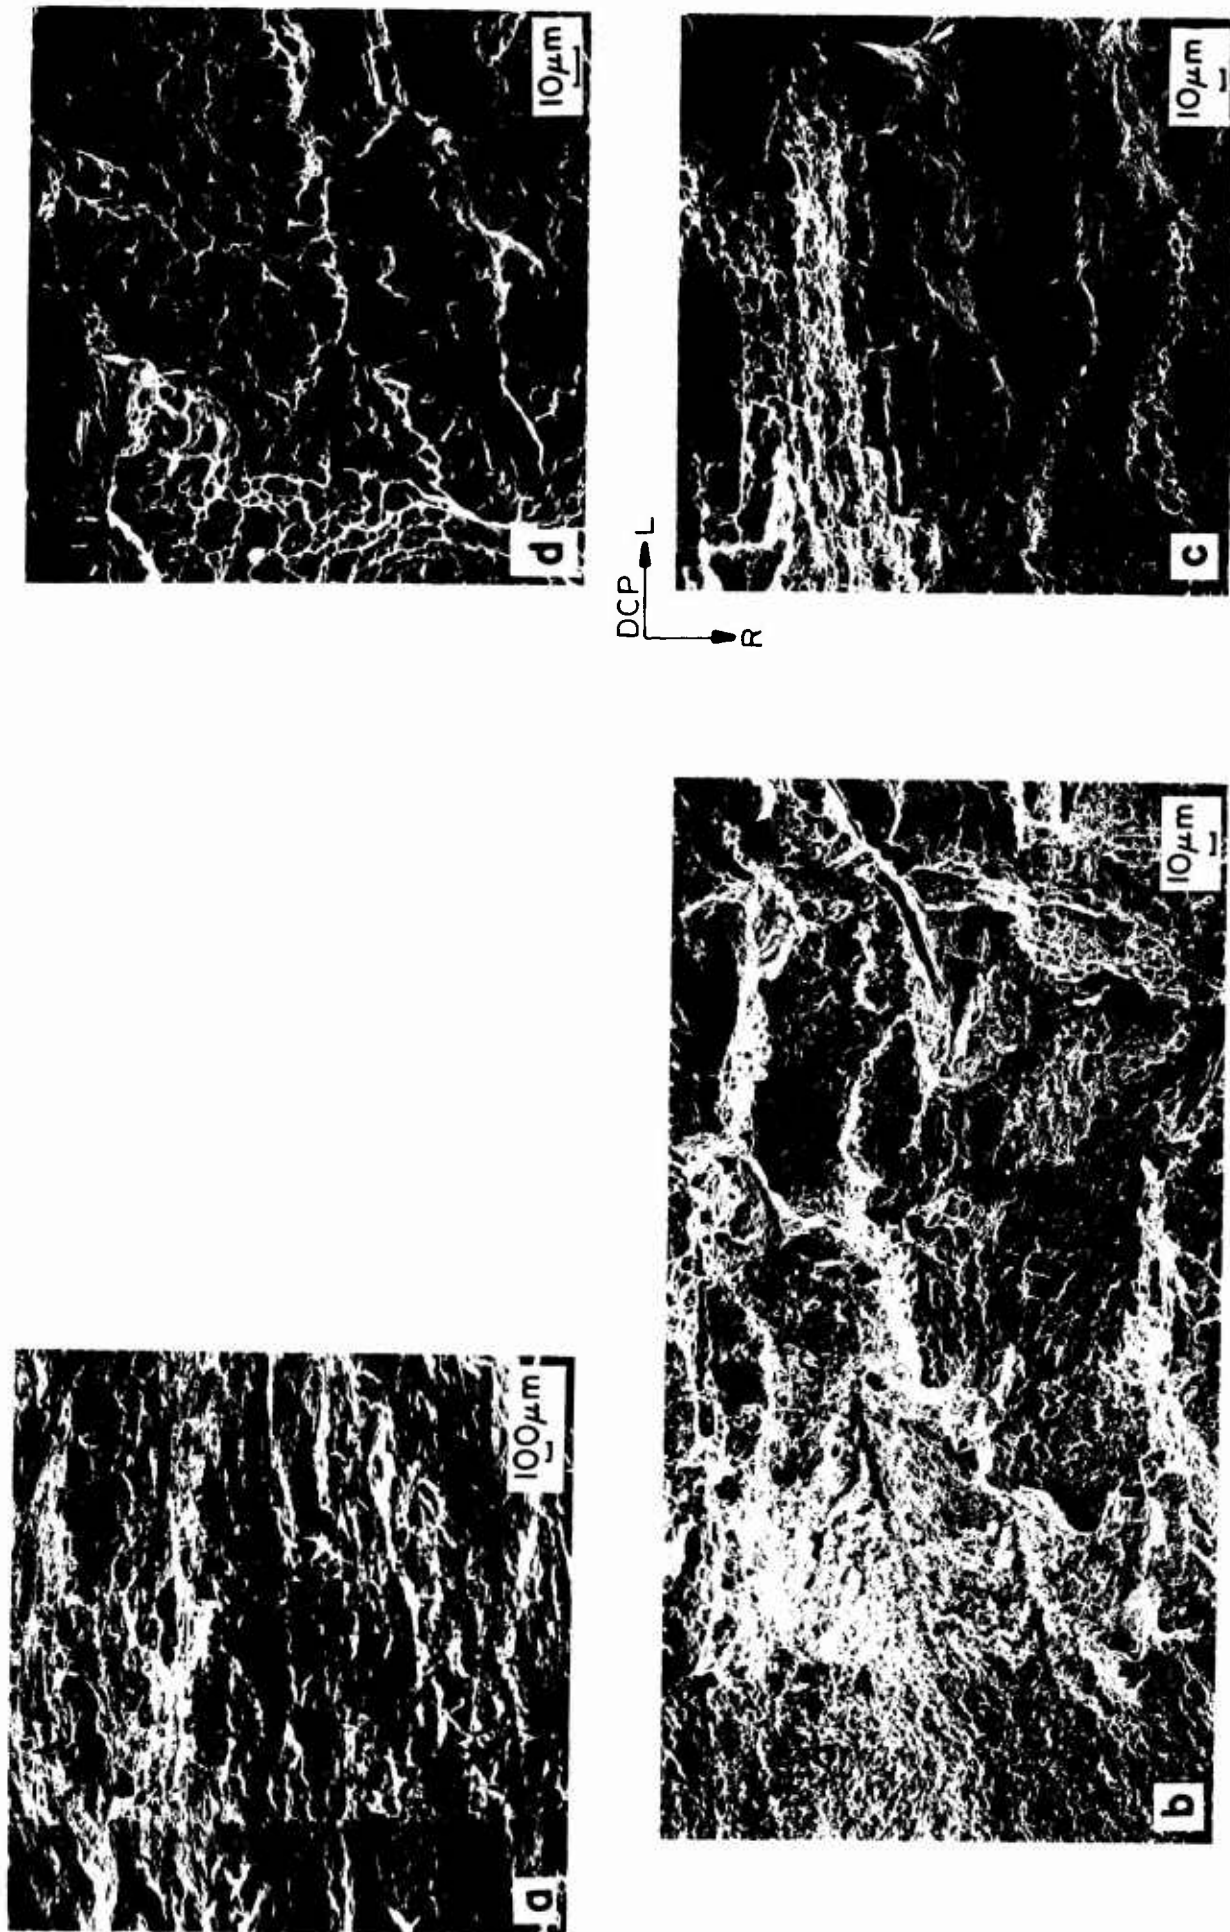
Alloy 334, sample 4SLC2. SEM of fracture surface (a) X25, (b) X250-precrack/fast fracture transition, (c) X250, (d) X500 - fast fracture.
